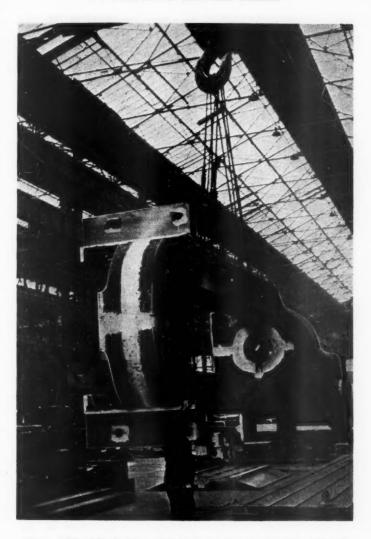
One of the 85-ton housings for a new three-stand tandem cold mill.
